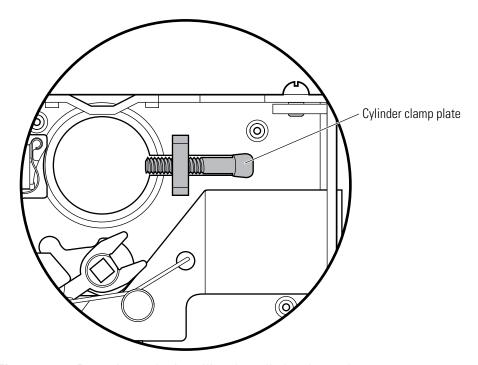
Removing and reinstalling the cylinder clamp plate
